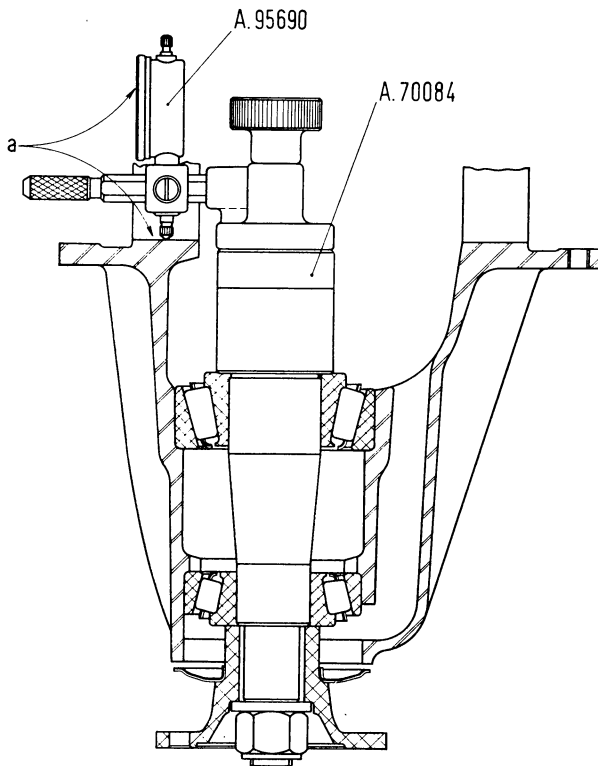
Diagrammatic view of how dummy pinion A. 70084 and dial indicator A. 95690 should be fitted to determine drive pinion rear bearing thrust ring thickness.
